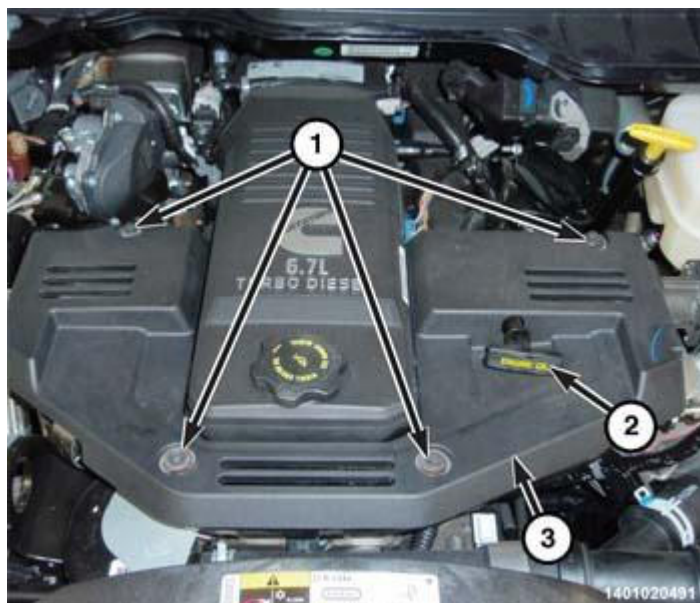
Engine Cover, Bolts & Oil Dipstick
